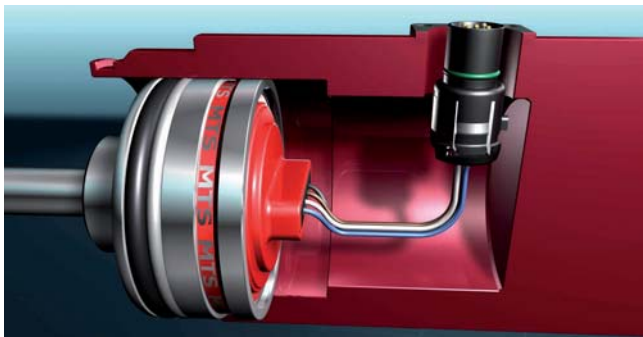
The MH sensor is delivered by MTS together with the new connector system: The connector insert carrier is already connected to the sensor electronics, i.e. no soldering, any color or connection mistake.
